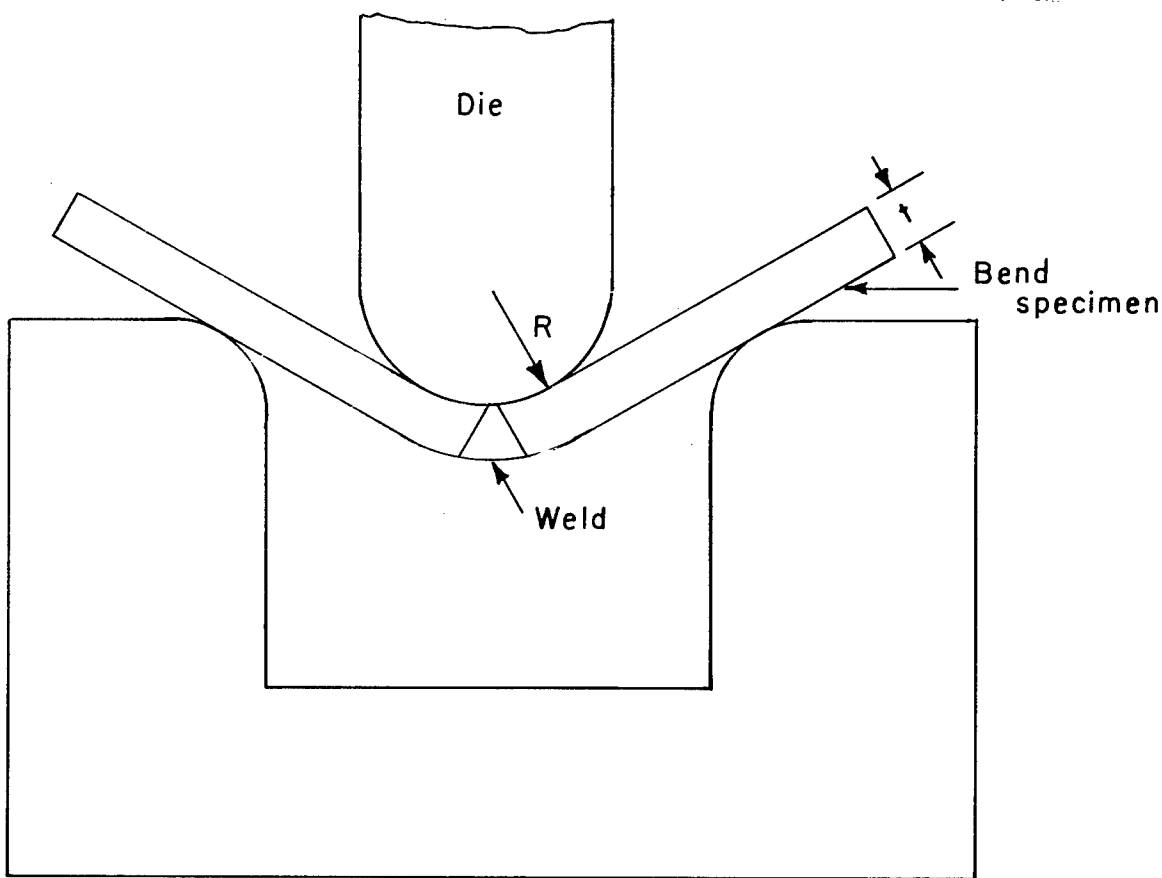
SCHEMATIC REPRESENTATION OF THE BEND TEST NORMALLY USED FOR WELD-PROCEDURE QUALIFICATION (Weld is oriented for face bend test)
